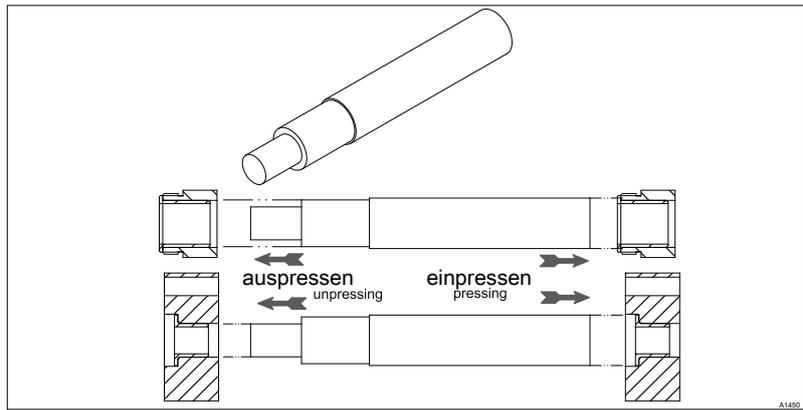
Tool for pressing the plastic slide bearings in and out, part number 1036907
